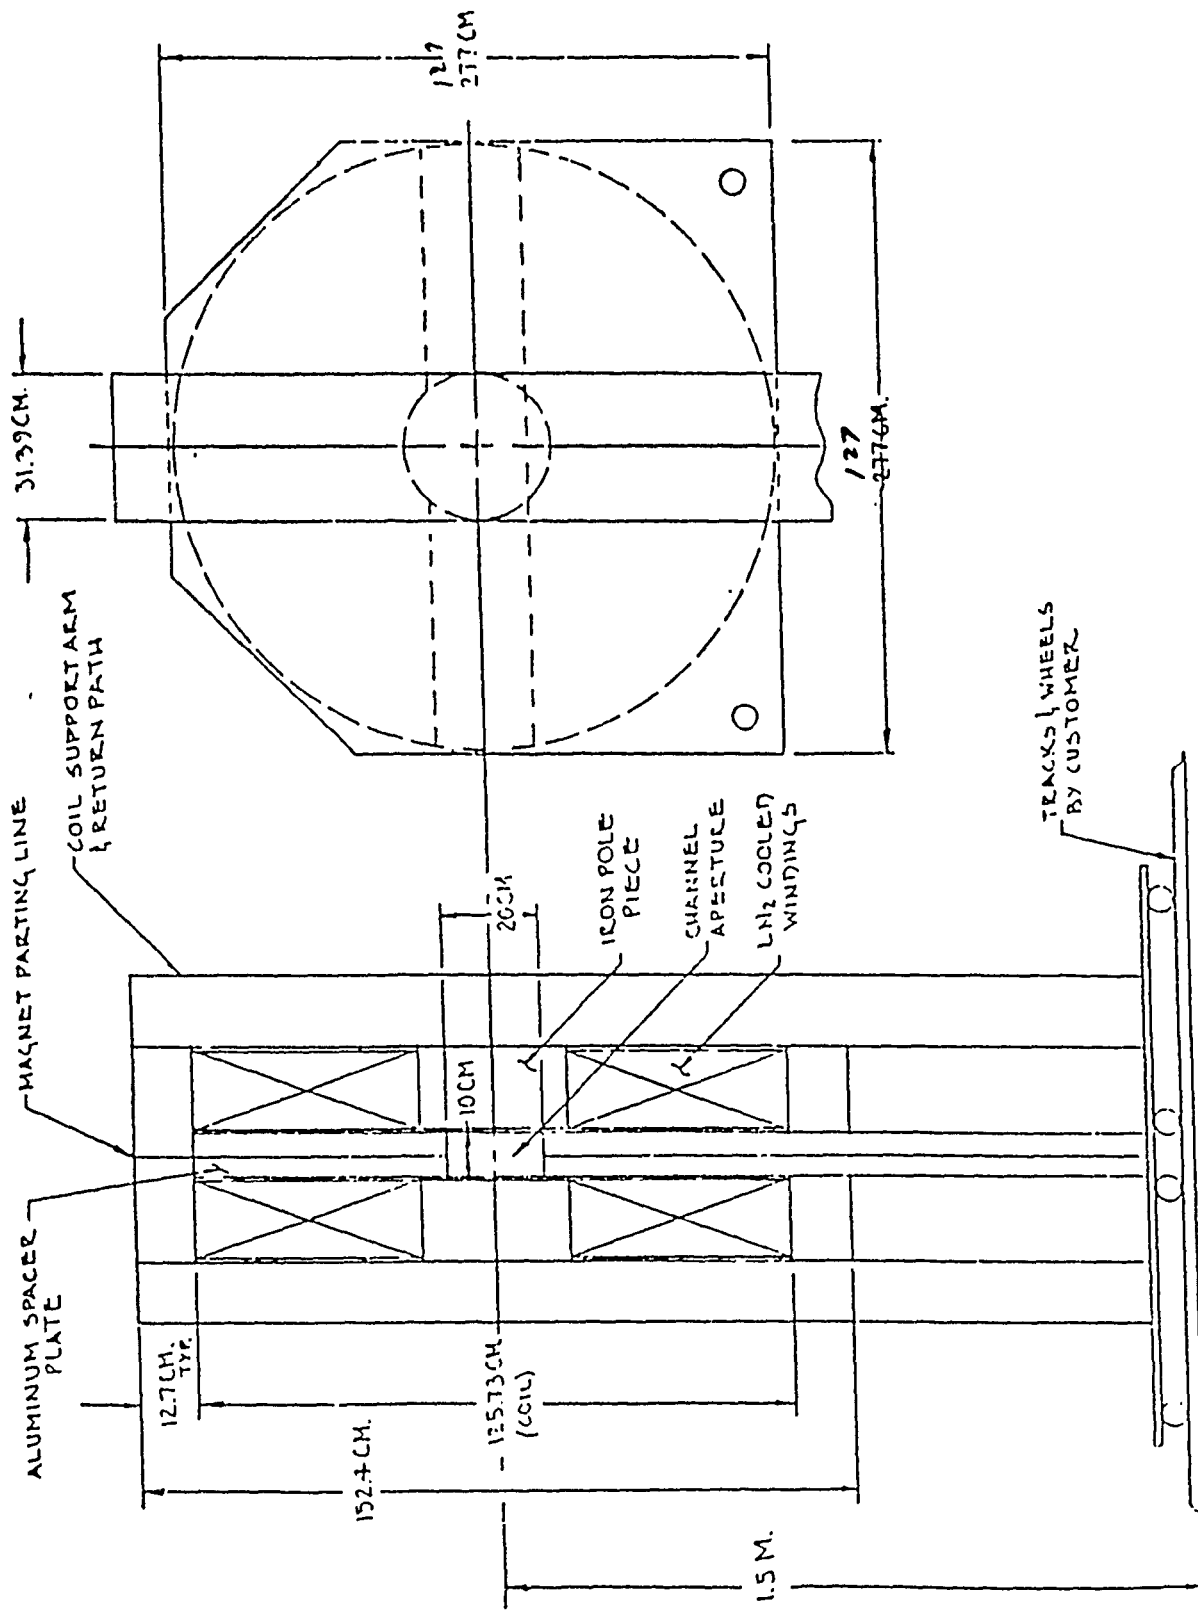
6.0 Tesla Magnet Field - Mechanical Drawing
